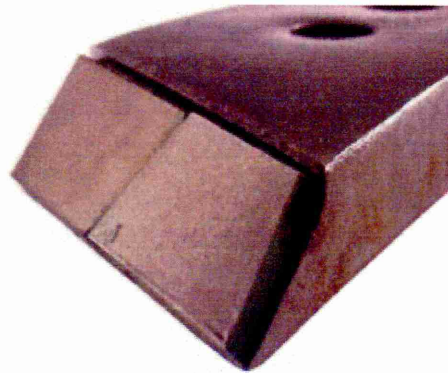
Soil working tool with Tungsten carbide tile brazed to leading edge.
